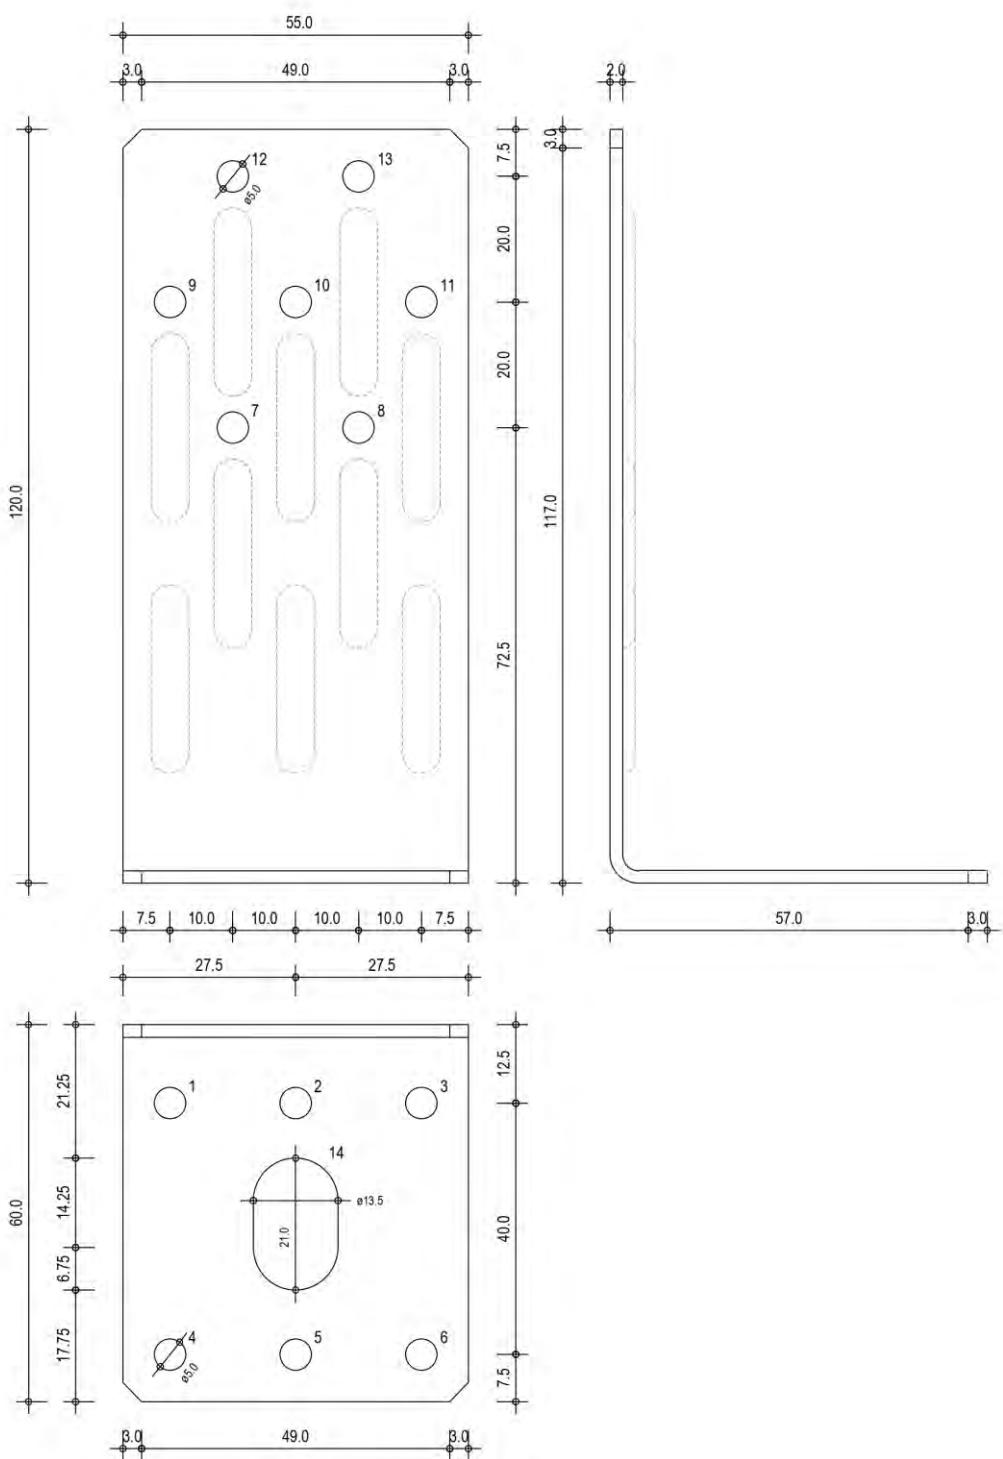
Dimensions of Angle Bracket 110836 and Washer 111314
